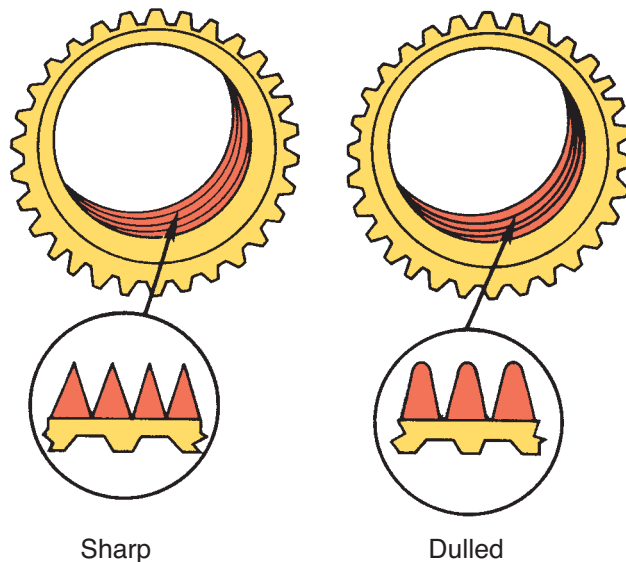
Grooves on the internal surface of the synchronizer blocker ring must be sharp.
